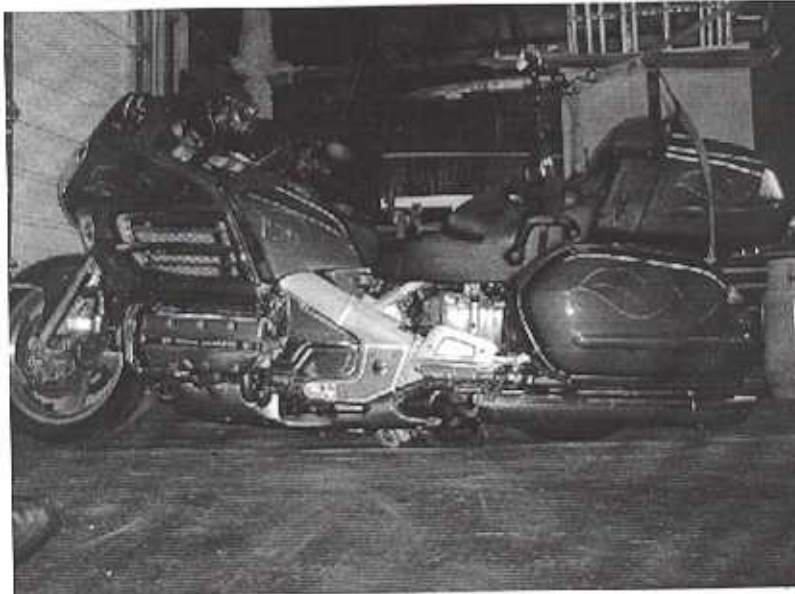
2002 GL1800 (built 6-02) w/1600 miles – Separated crossmember
